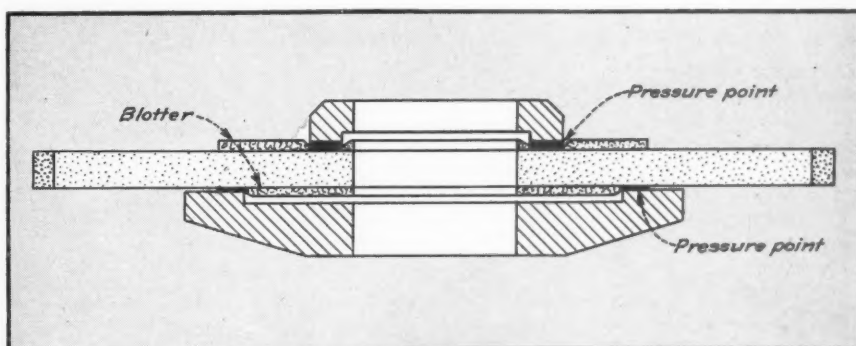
Flanges of unequal diameter are a definite accident hazard. Unbalanced pressure of the flanges will break the wheel. Also the lower washer is too small and wheel flange does not have full bearing surface on the soft washer. This should be watched carefully.
